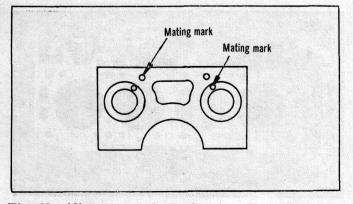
Alignment of the Rocker Arm Shaft Assembly
